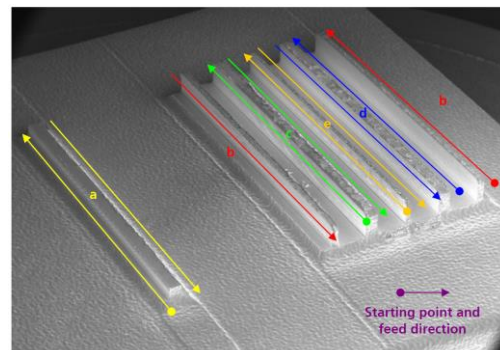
Machining order of different geometrical shapes with different cutting conditions using the air-driven spindle.
